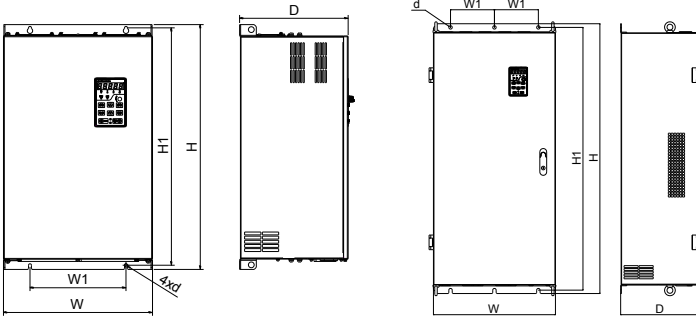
18.5~132kW Wall mounting diagram (1) 160~400kW Wall mounting diagram (2)
